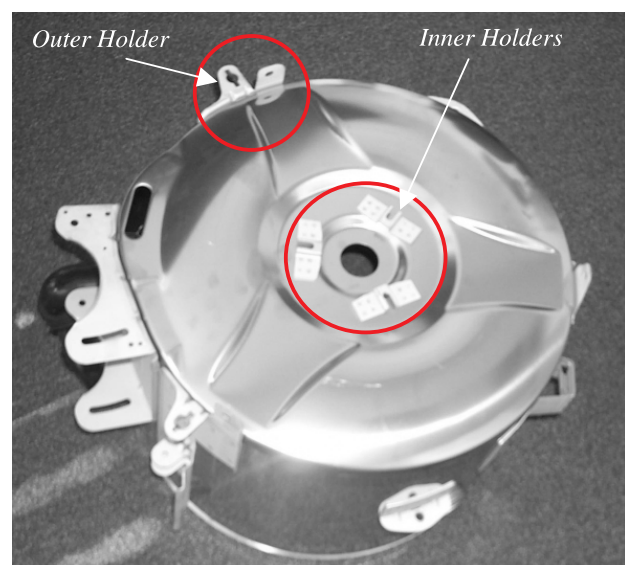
Holder cross welded on the drum of a washing machine
